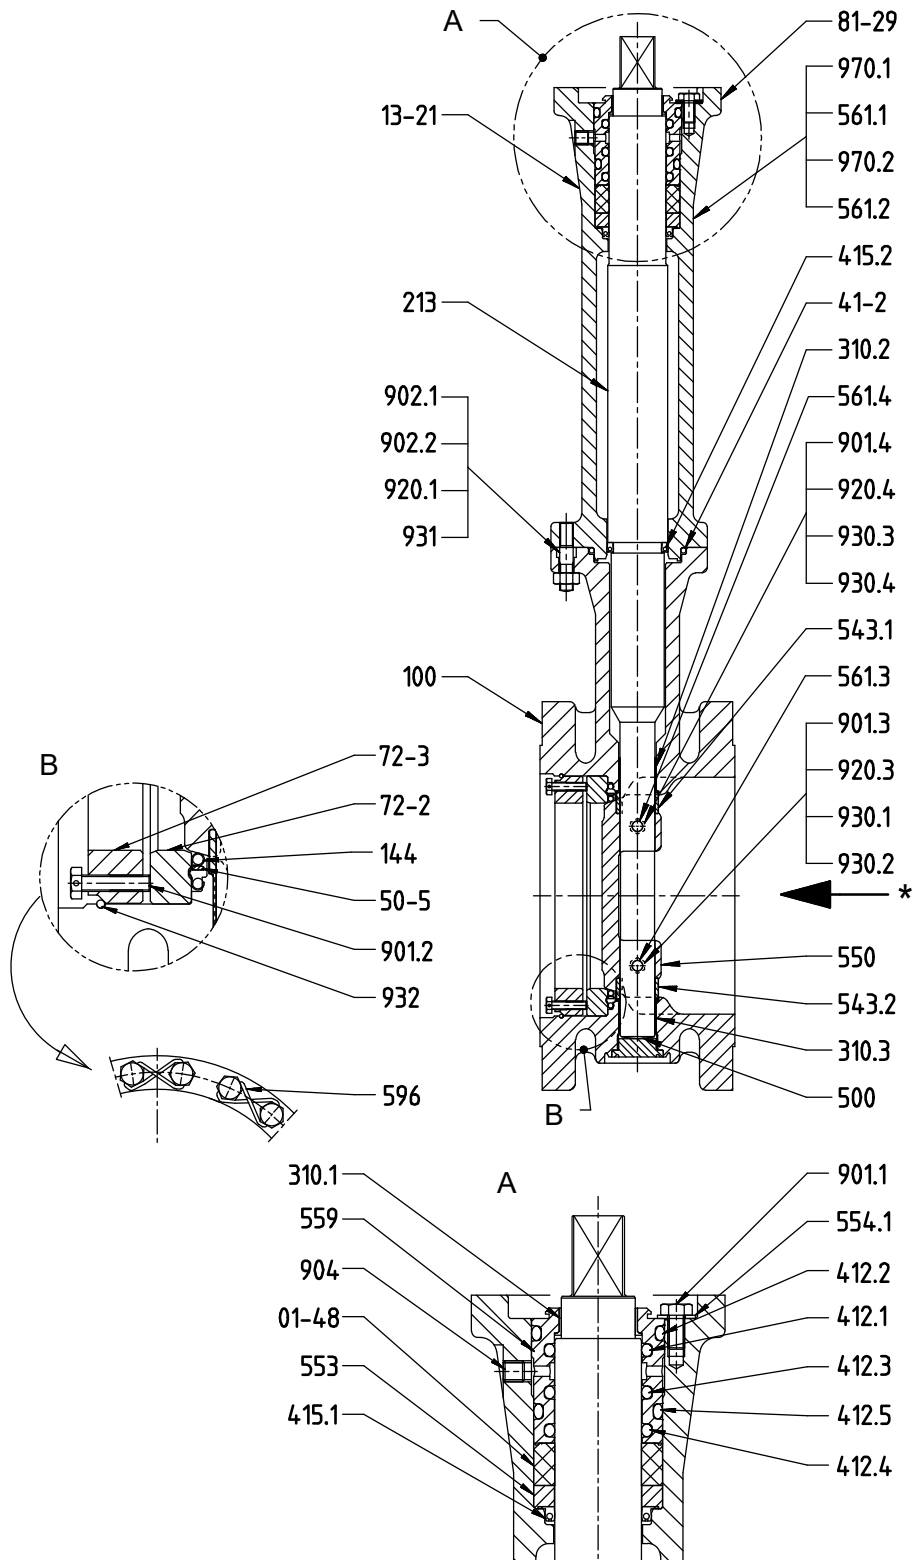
Sectional drawing of TRIODIS 150 CRYO T7 - DN 80-150 (3-6 inch)
